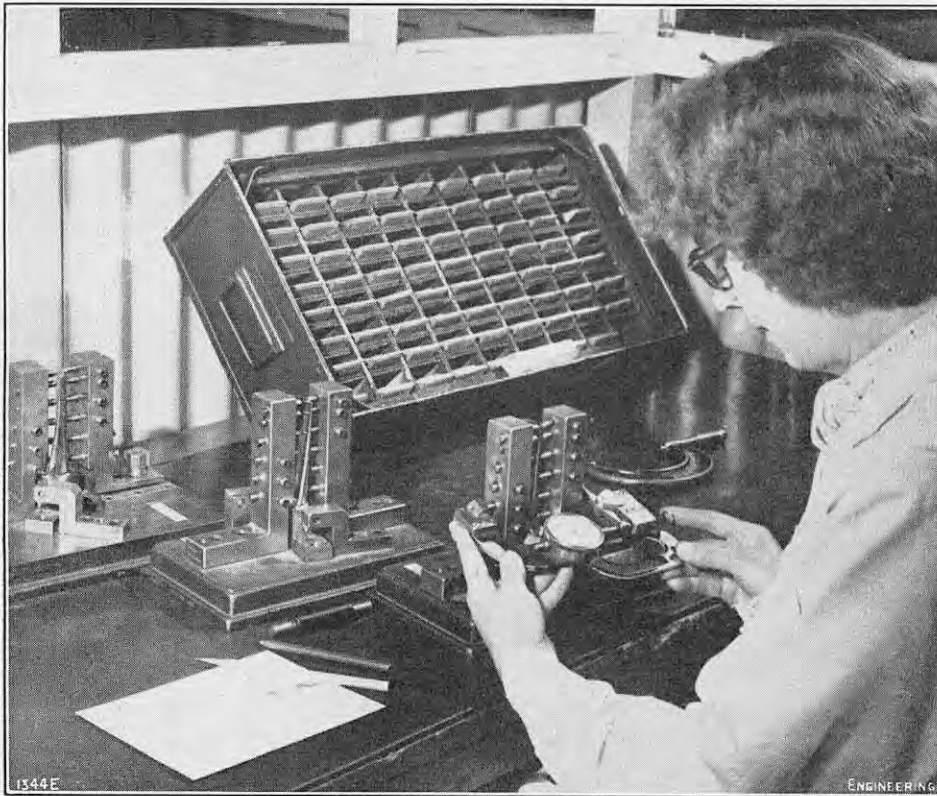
FIXTURE FOR CHECKING SECTIONAL THICKNESS OF BLADE.
